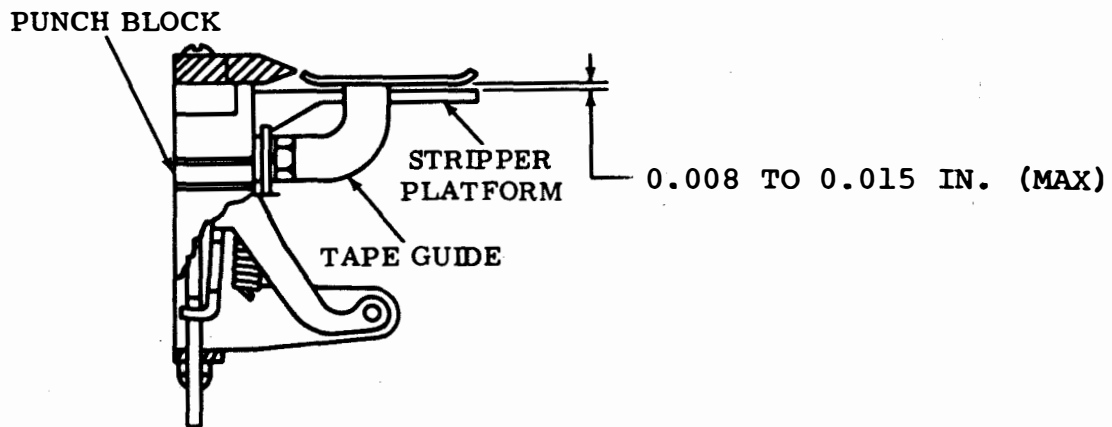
Tape Guide (On Units Not Equipped with Tape Guide Adjusting Plate)
